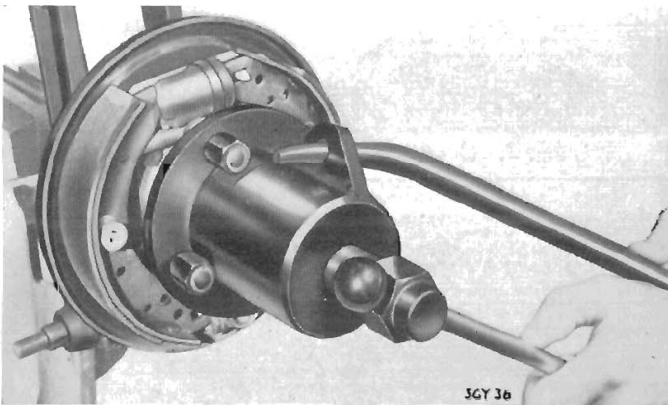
Using Churchill extractor No. S109 to remove rear hub
